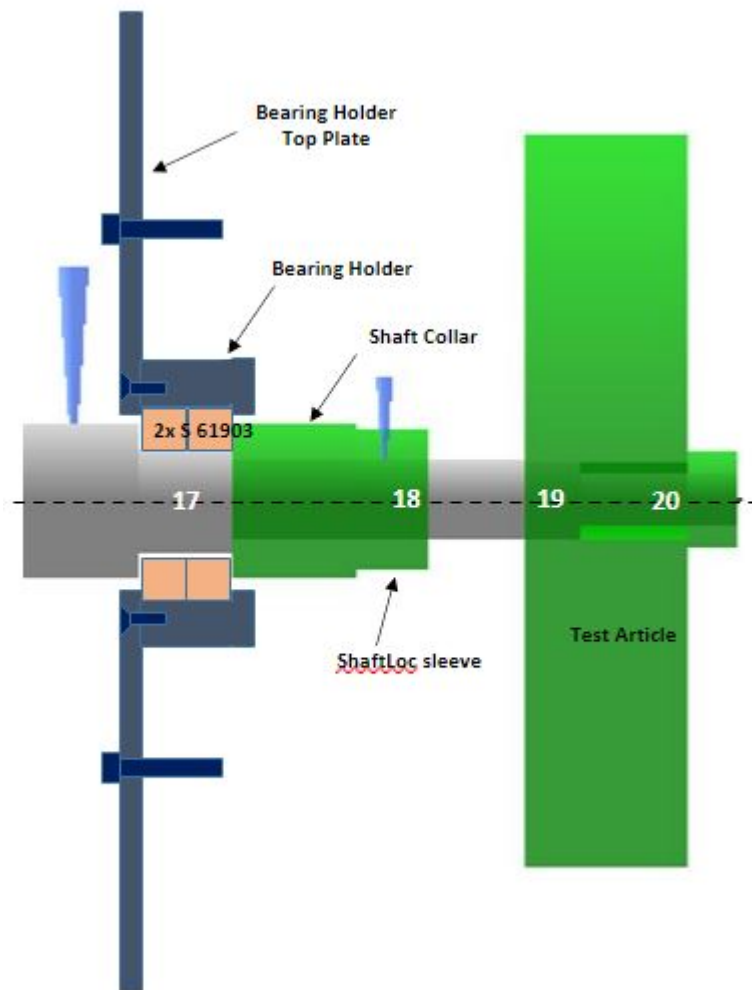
NDE Backup Bearings: Double Row Angular Contact Ball Bearings, Face-to-Face Arrangement, (2 x S 61903 C TA)
